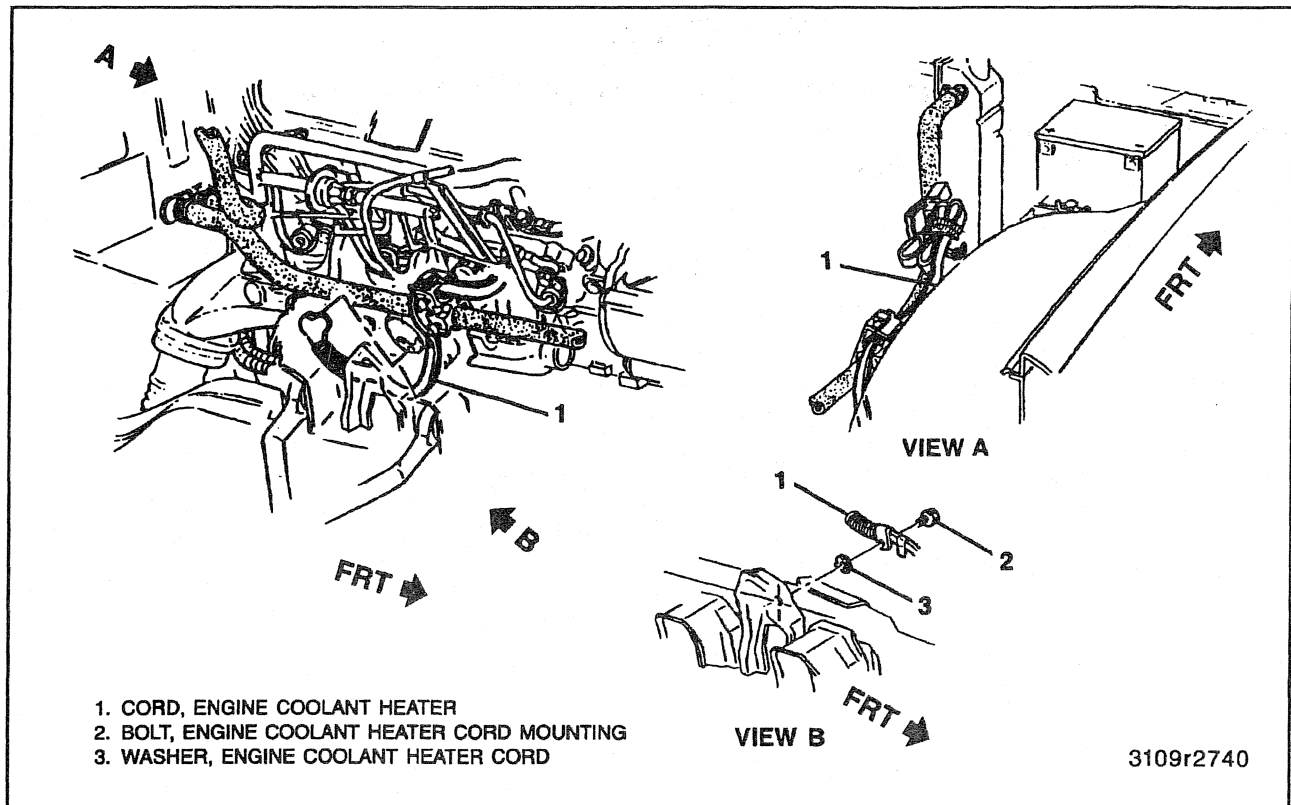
Engine Coolant Heater Cord Routing (Four-Wheel Drive Models with 7.4L Engine)
